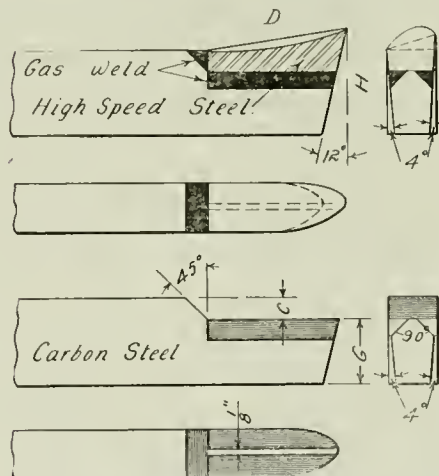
PREPARING TOOLS FOR WELDING.
